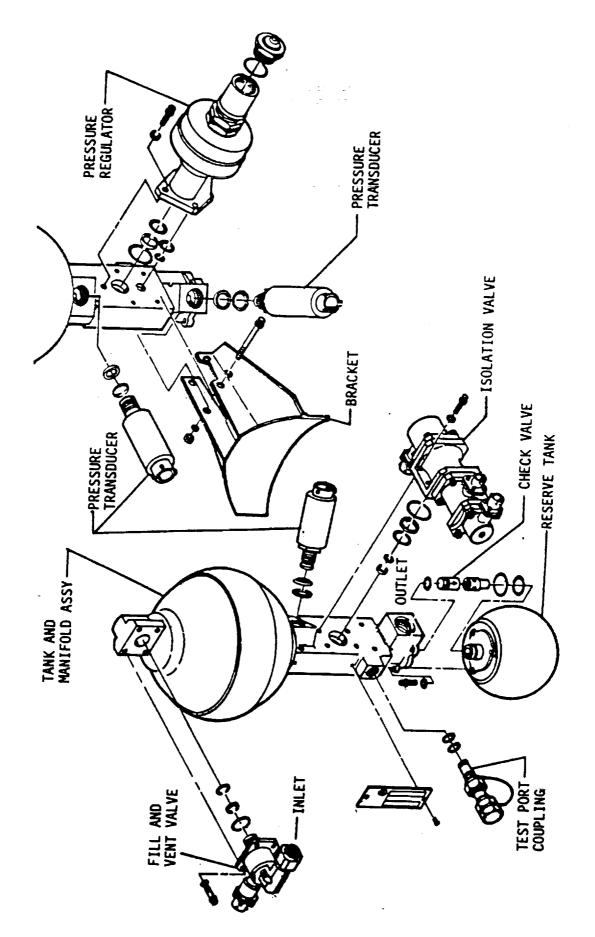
GN2 PNEUMATIC PACK ASSEMBLY
